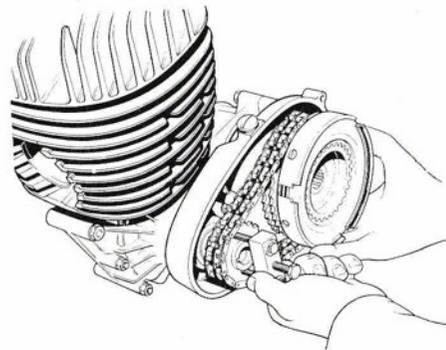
Removing engine sprocket, chain and clutch as a set. Note engine sprocket puller fitted.
